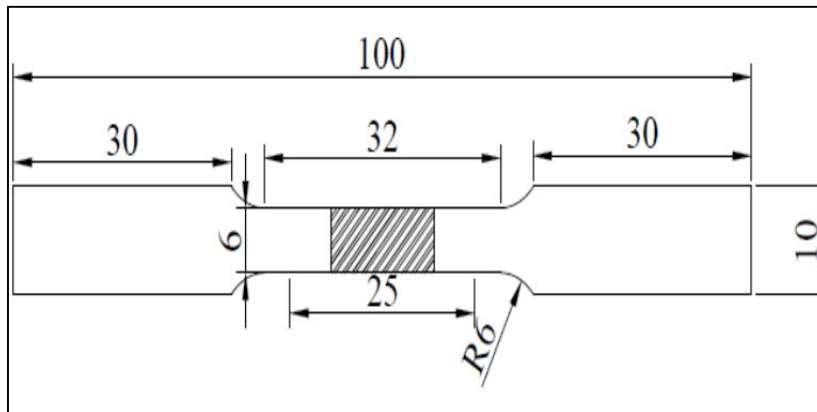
ASTM- E8M Sub-Size Sample for Tensile Test, all dimensions are mm [11].
